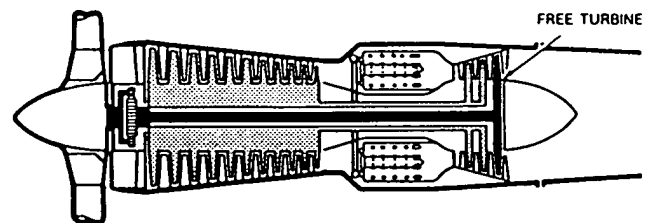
Turboprop with Propeller Driven by a Free Turbine through Reduction Gearing
